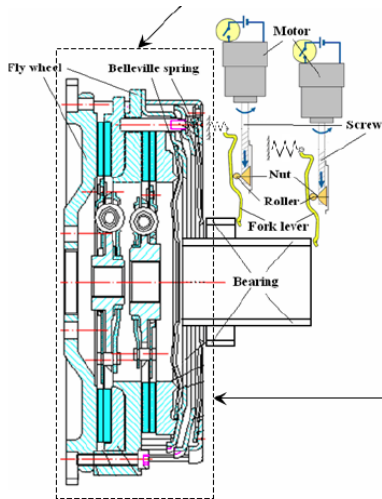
The dry dual clutch system with fork-lever actuators driven by motor-screw-roller assemblies[22]
